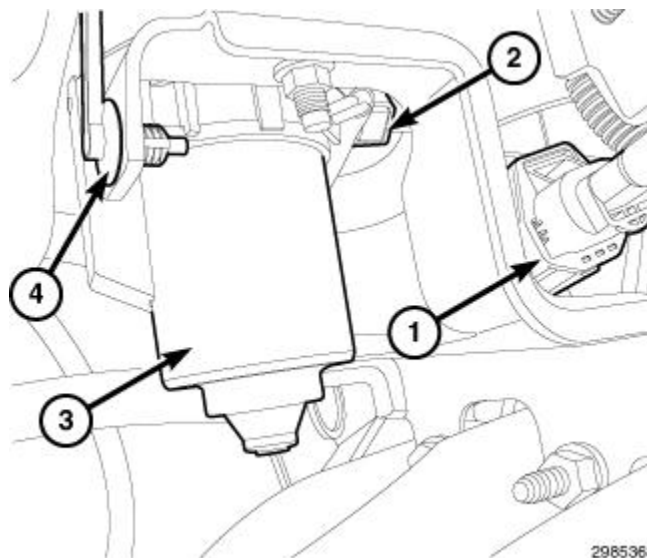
Electrical Connector, Harness Connector, Hose & Vacuum Pump
